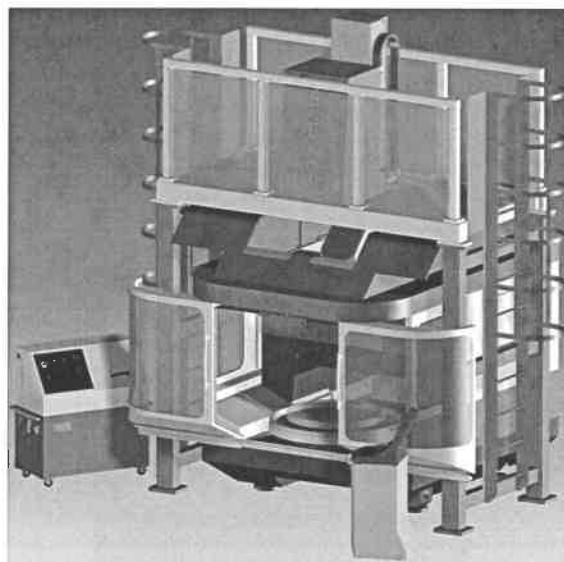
CAD representation of the On-Machine metrology system. IRP 1000 polishing machine, optical test tower and interferometer mounted on 5-axis CNC stage..
